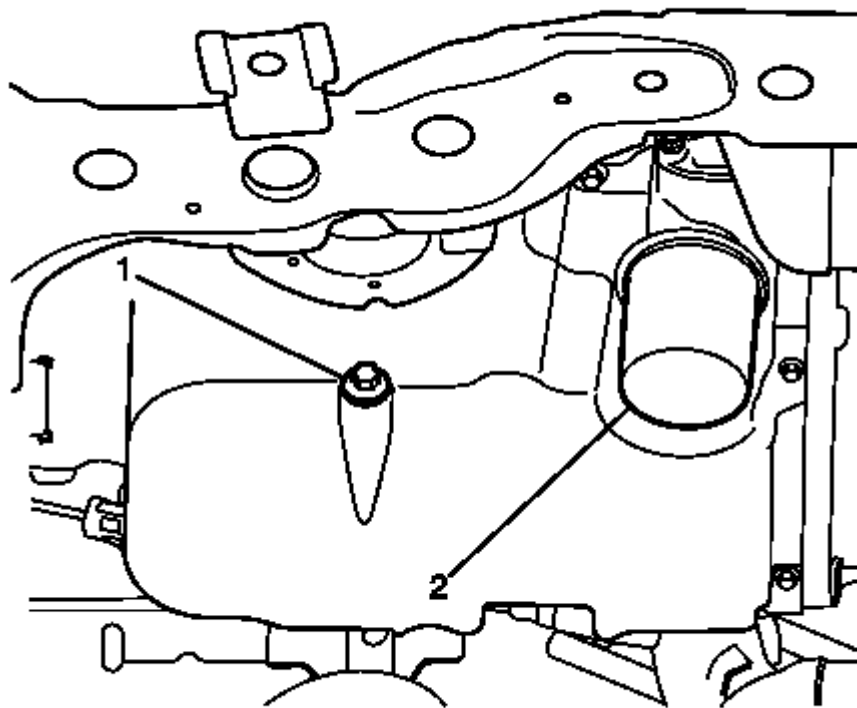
Identifying Oil Pan Drain Plug & Engine Oil Filter
